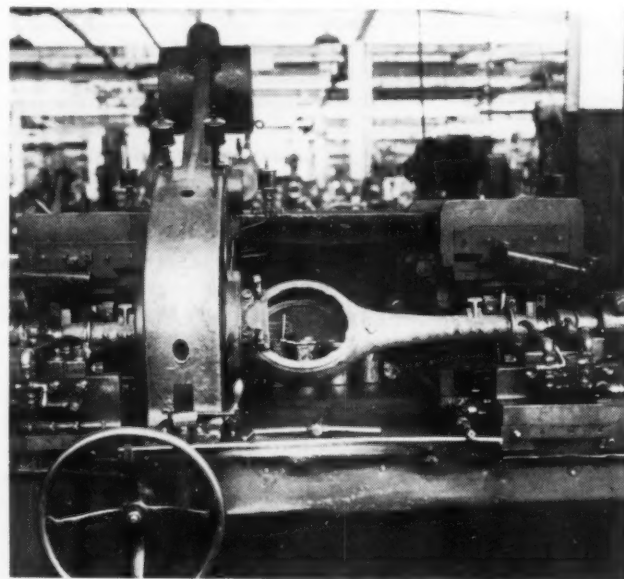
MACHINING OF MALLEABLE-IRON AUTOMOTIVE REAR-AXLE HOUSING
